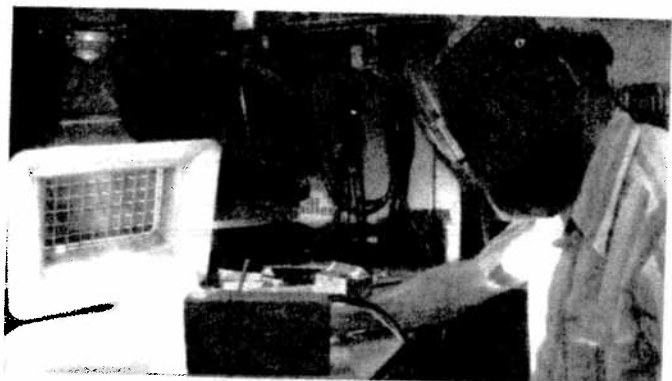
Welding hoods have sufficient airflow to reach outside of the hood to capture welding fumes.
